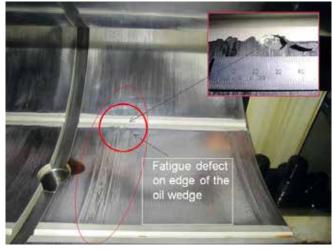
K98 crosshead bearings and T/C cut-out, minor fatigue damage
